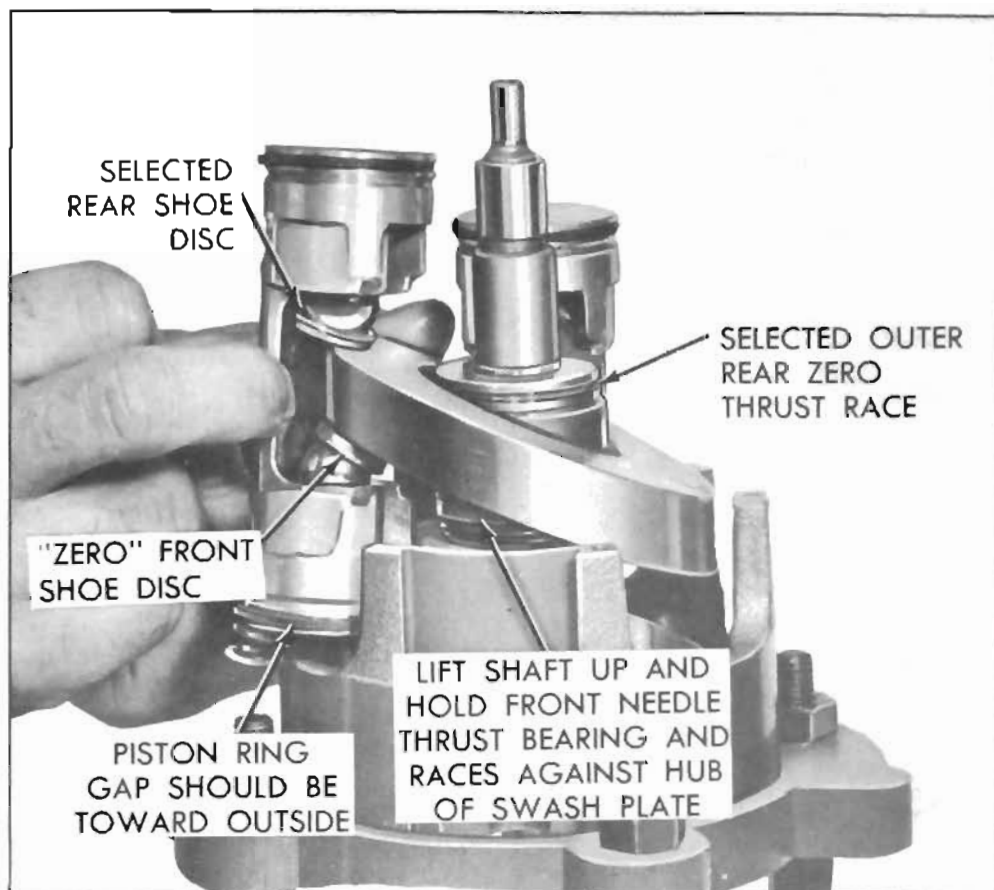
Installing Piston Assembly in Front Cylinder Half
